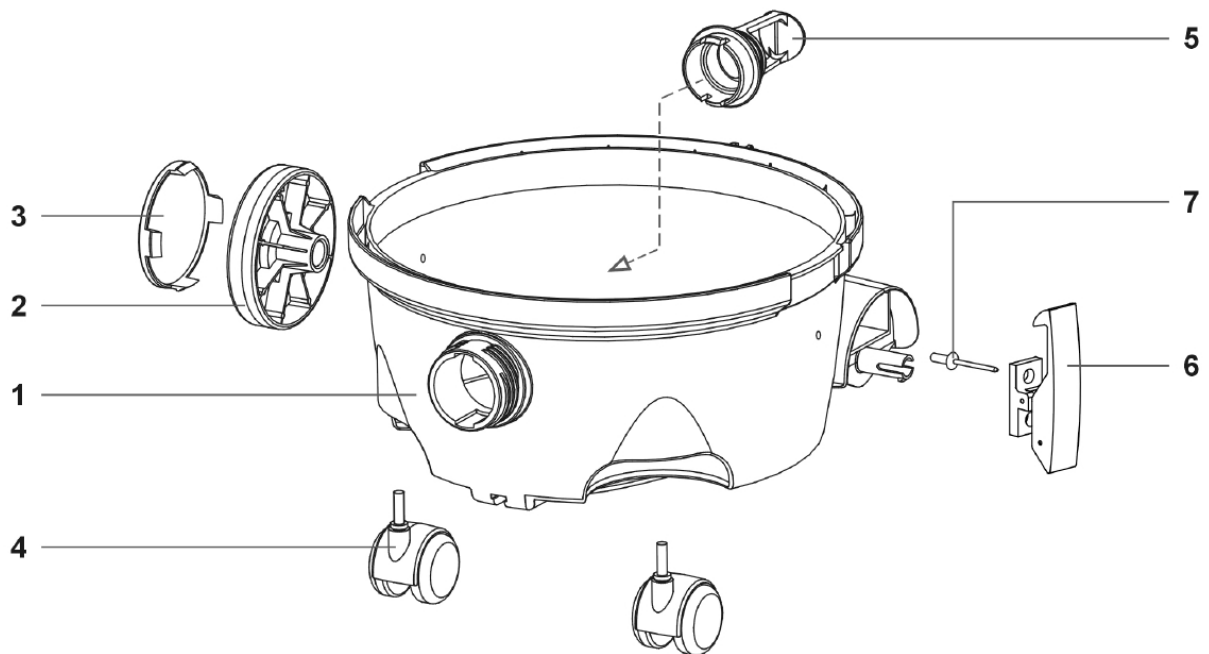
Spare parts drawing 3, base frame, flexCAT 112 Q
